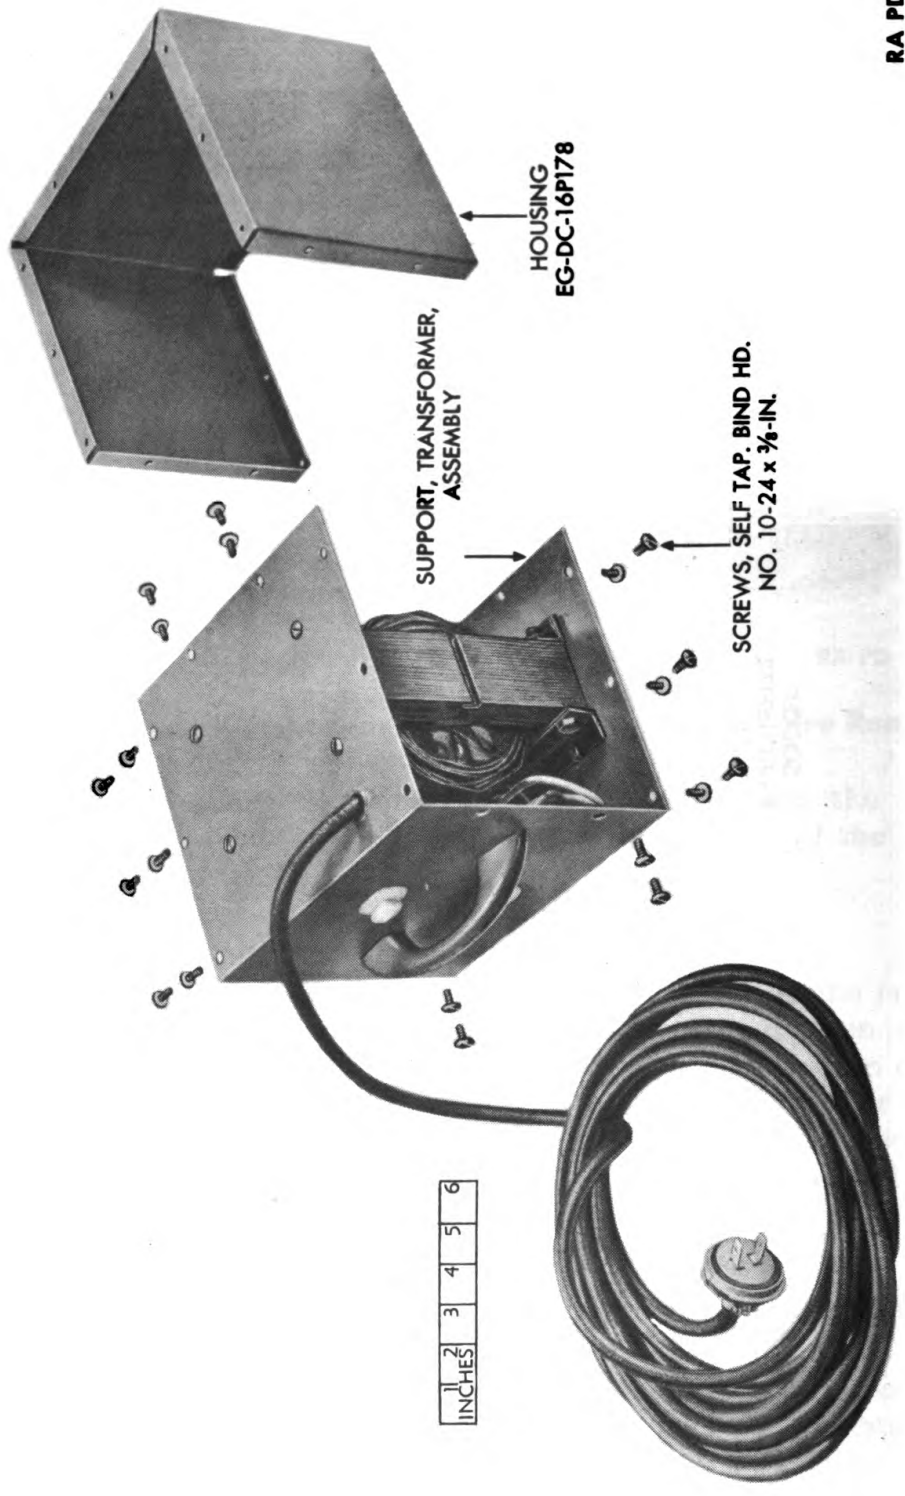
Ultraviolet Lamp Transformer — Housing Removed
